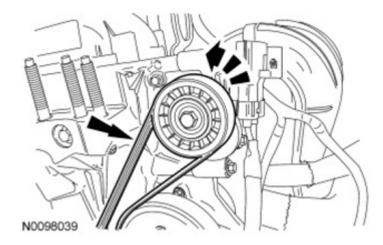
Locating Exhaust Manifold Studs Courtesy of FORD MOTOR CO.
